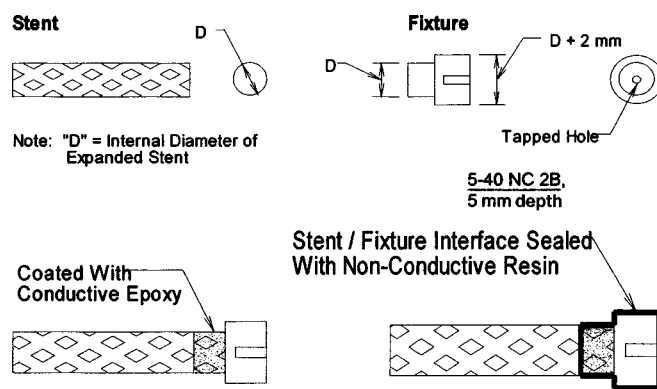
Diagram for Assembly of Stent-Holding Fixture
